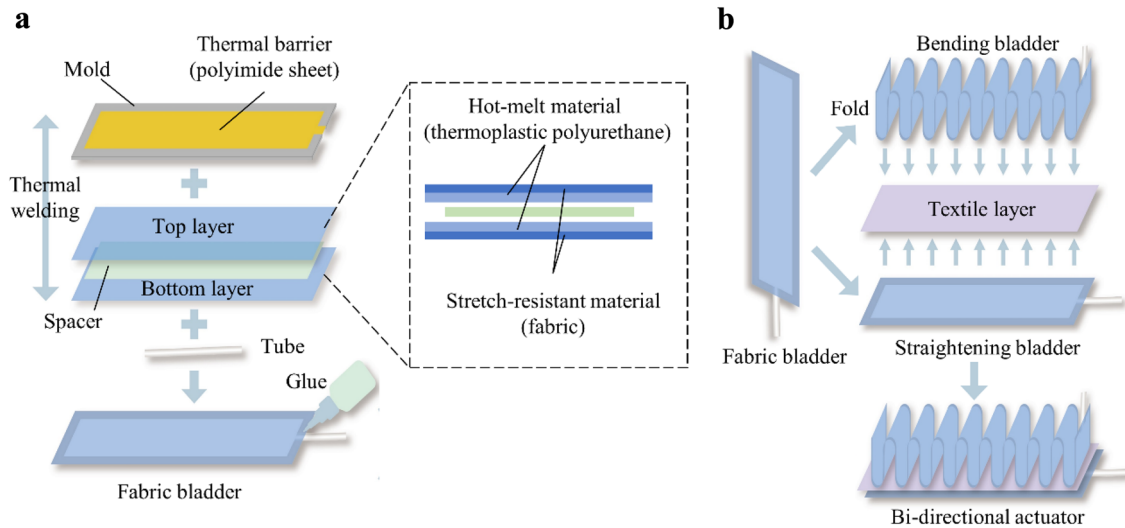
Components and fabrication of the fabric-based bi-directional actuator. a The main fabrication process of the fabric bladder and b assembly of the bi-directional actuator
